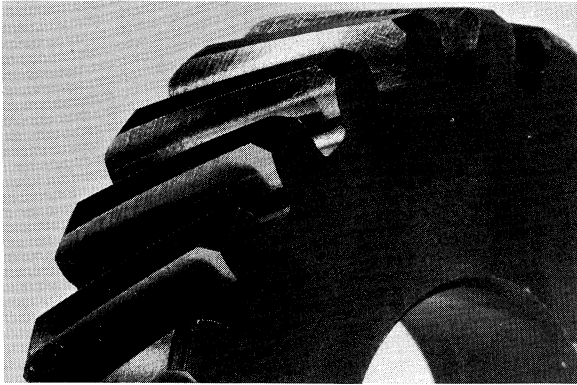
Typical rotary-shaved 10-D.P. helical gear teeth with a surface finish of 16-microinches.
